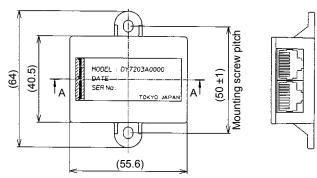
Modular branch unit (model DY7203A0000) (mm)
